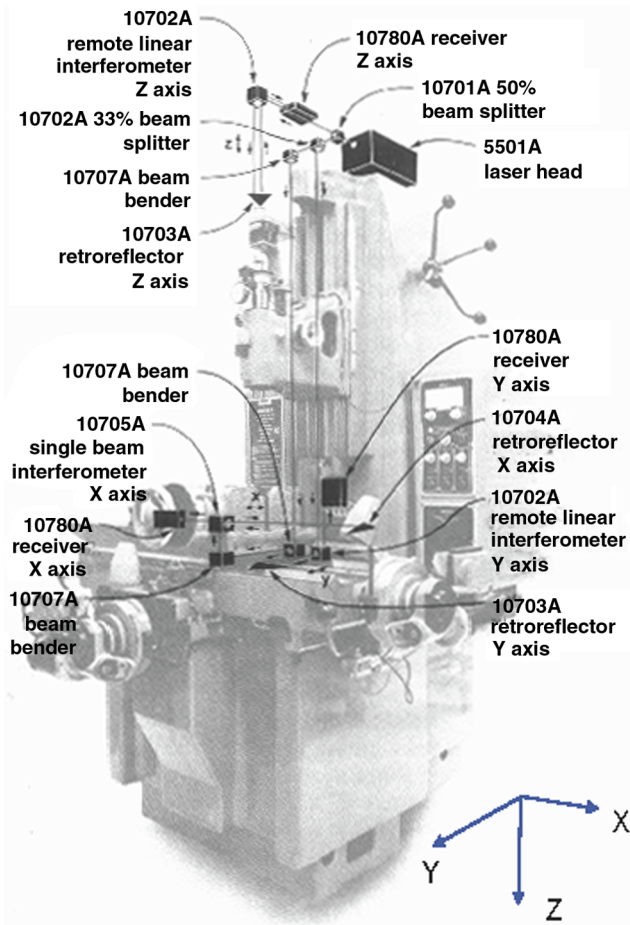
A universal tool machine equipped with a Hewlett-Packard three-axis laser interferometer (See Ref. 2, Sec. 4.2.3).⁴
